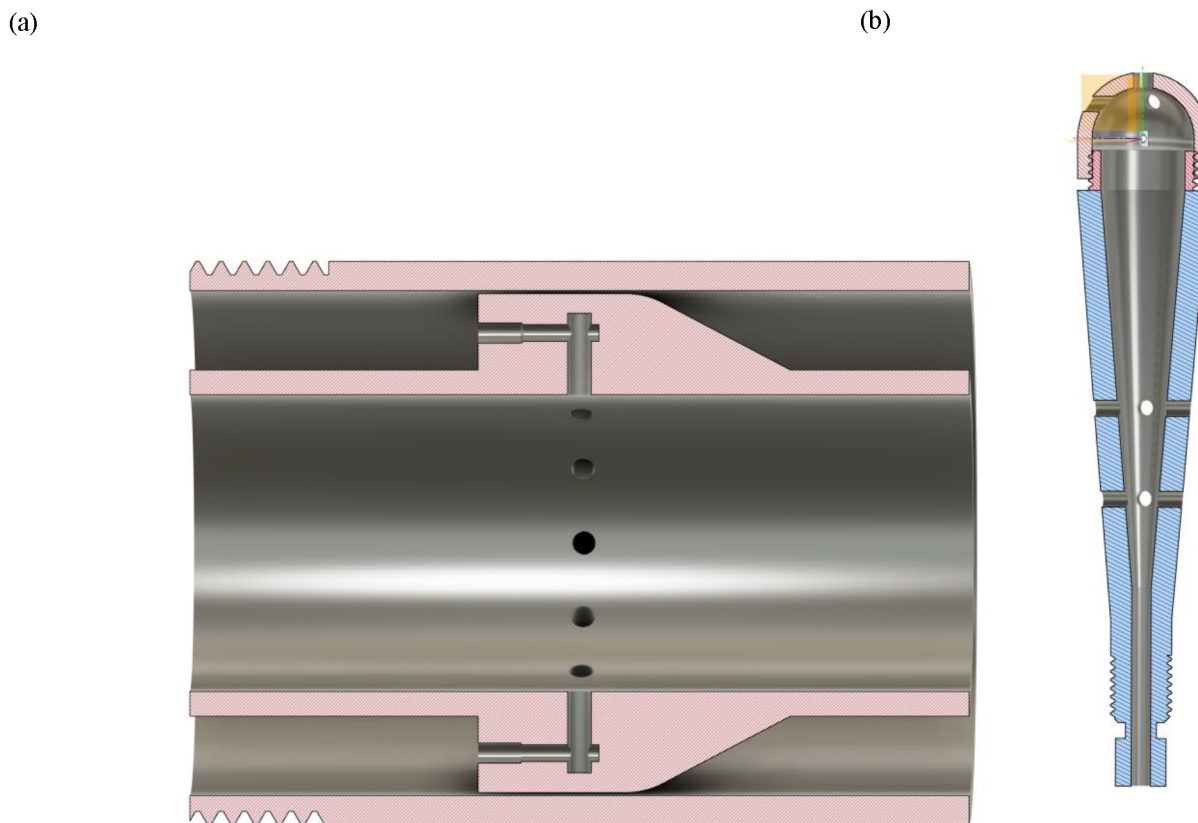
Cross section images of the C-AICD fixture (a) and funnel (b).
